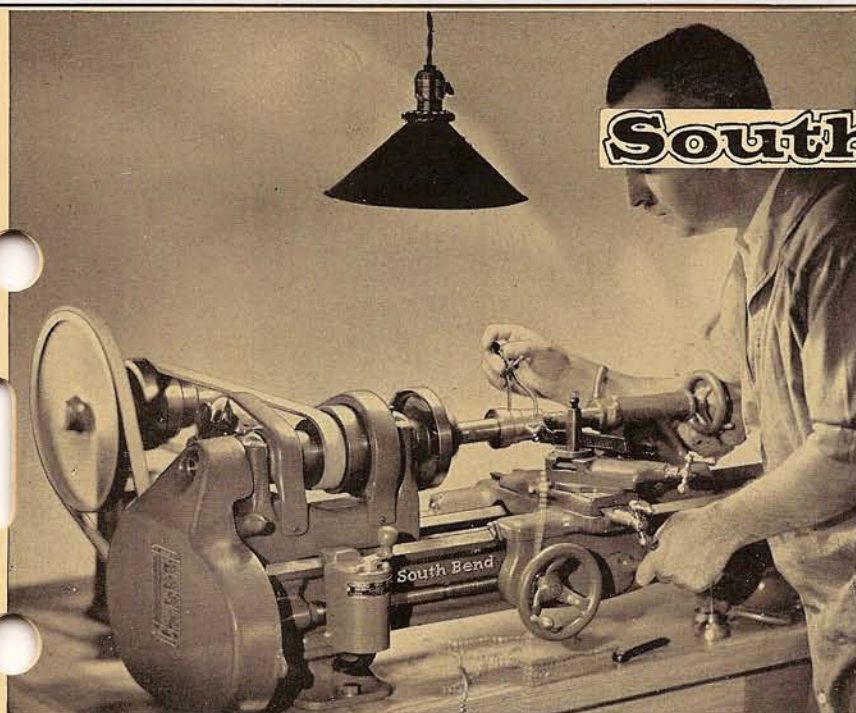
Making a Bushing in the 9-inch "Workshop" South Bend Lathe.
